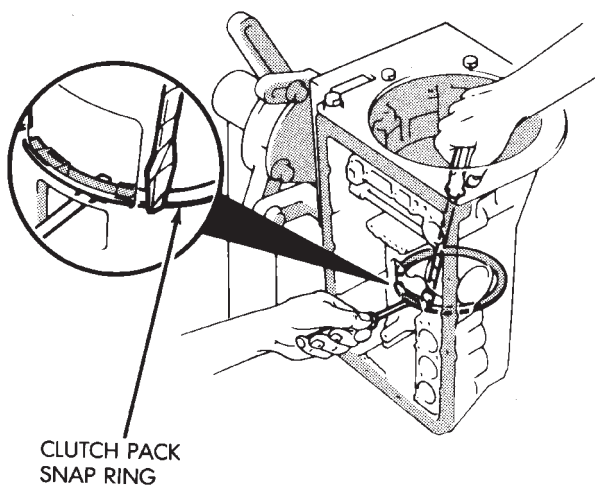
Removing Second Brake Clutch Pack Snap Ring
